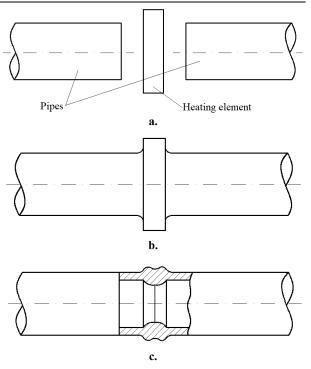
Welding plastic tubes: *a-preparation; b-heating; c-final merge.
